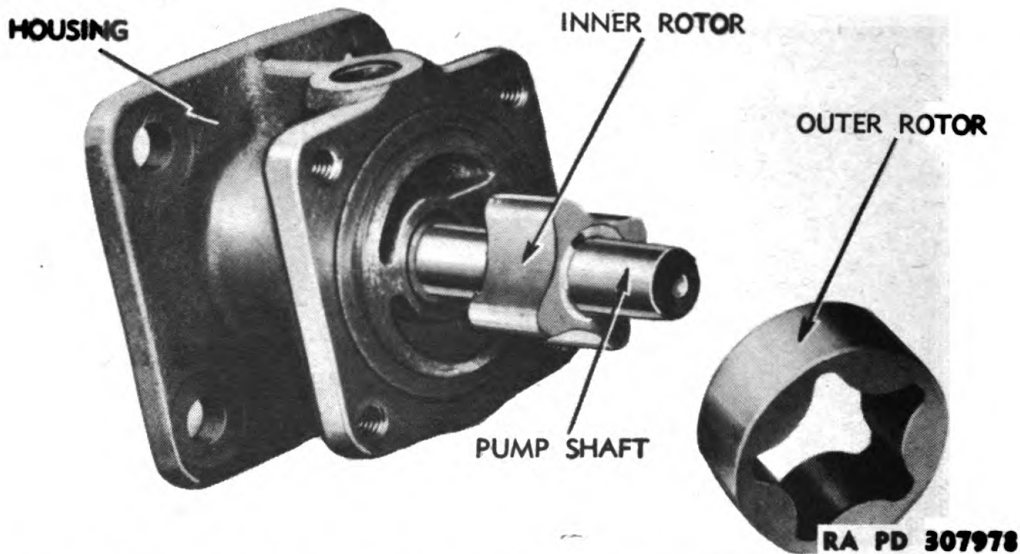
Fluid Pump Outer Rotor Removed From Pump Shaft
